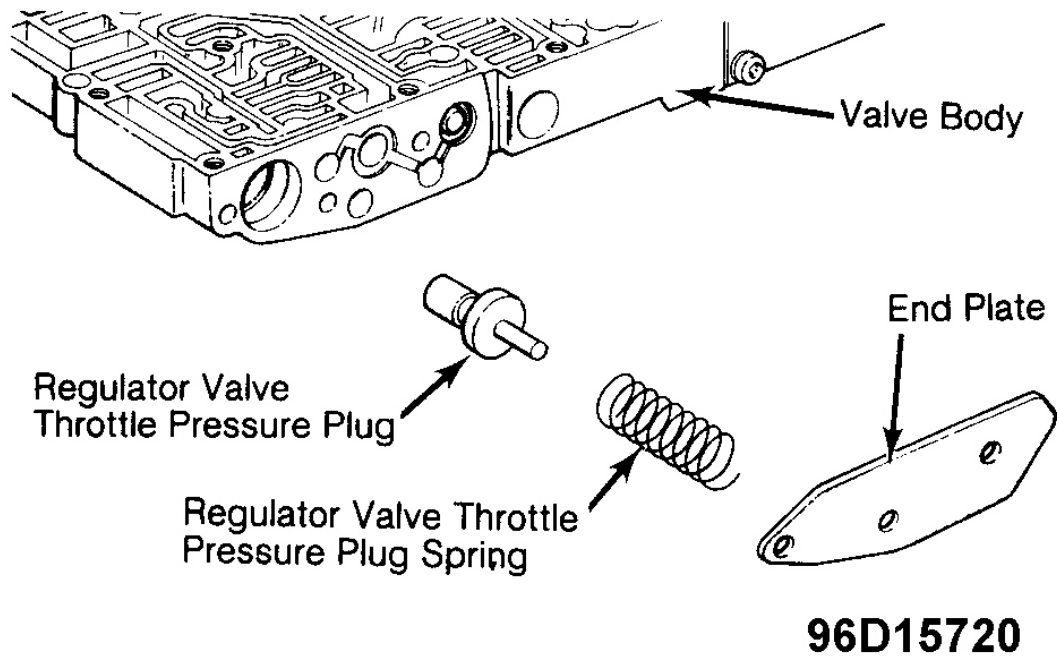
View of Regulator Valve Throttle Pressure Plug Assembly
